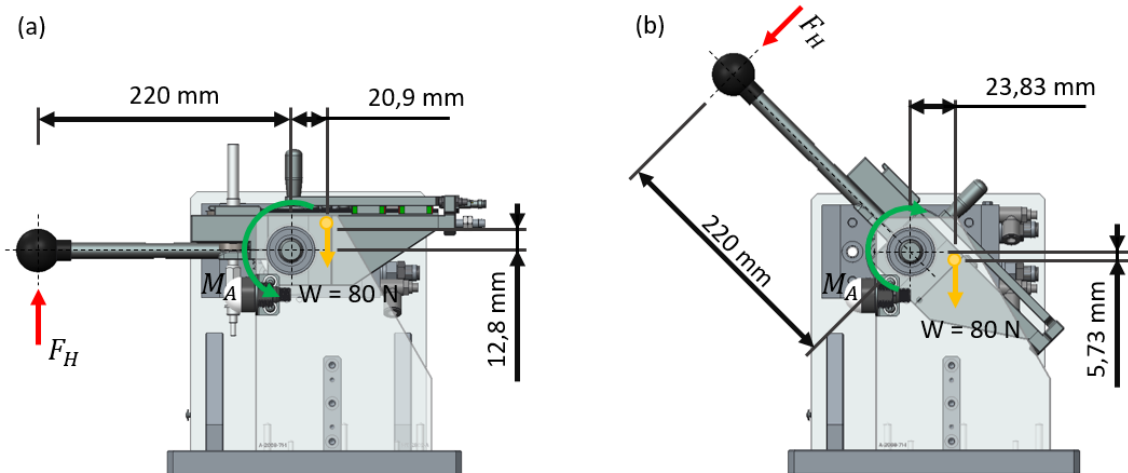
Dimensions required to calculate the forces at: a) Screwing position; b) Loading position
